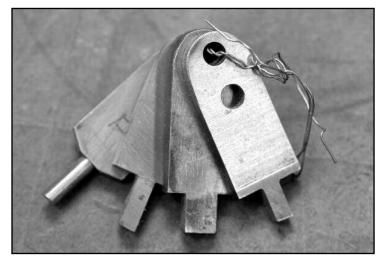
An assortment of punches for the Haughawout punch machine. A keyless punch is on the left while the remainder are for keyed punch machines. Photo: Ron Bopp.
